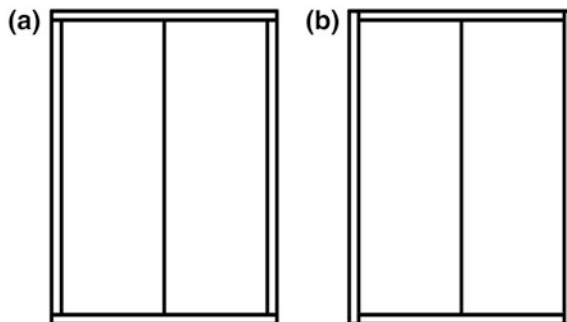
The division of case furniture depending on the relative positions of the sides, and top and bottom of the furniture piece: a flange, b rack
